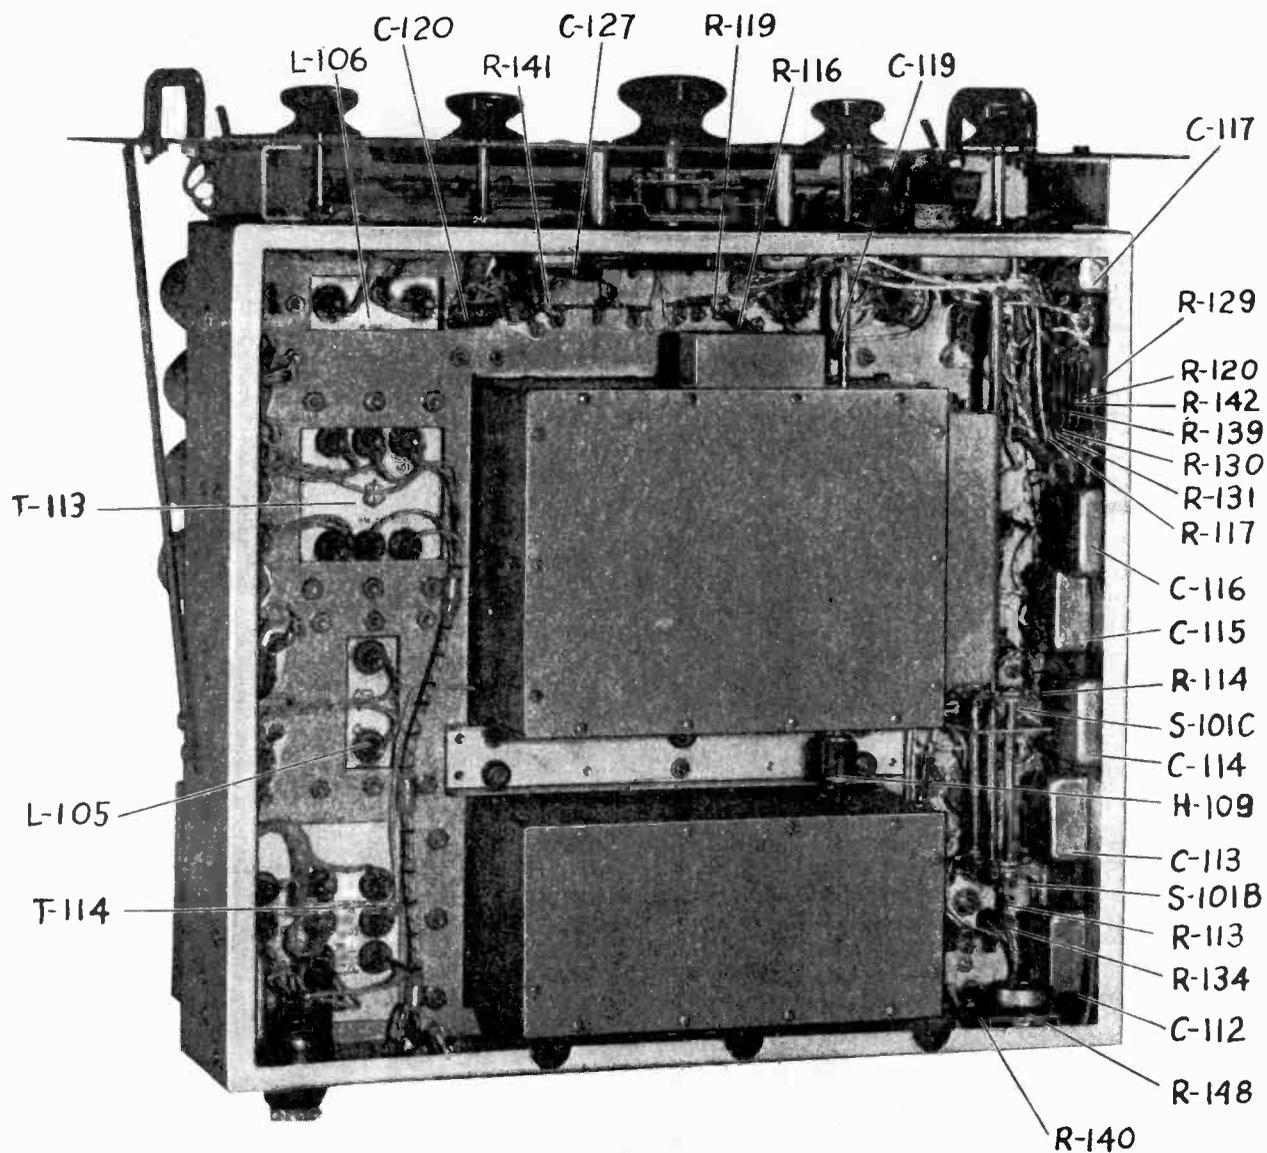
LEFT BOTTOM OBLIQUE VIEW, RADIO RECEIVER CHASSIS. BOTTOM COVER PLATE REMOVED.
